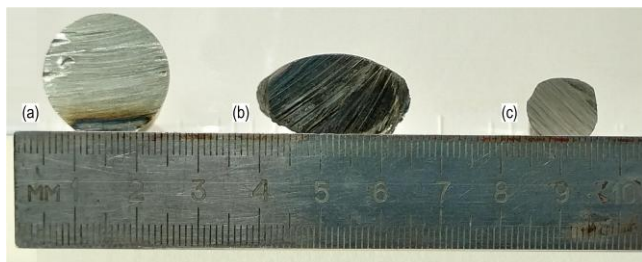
Cross-sections of samples: (a) initial, (b) after one pass, and (c) after four passes of rolling using the new "oval-round" pass design
